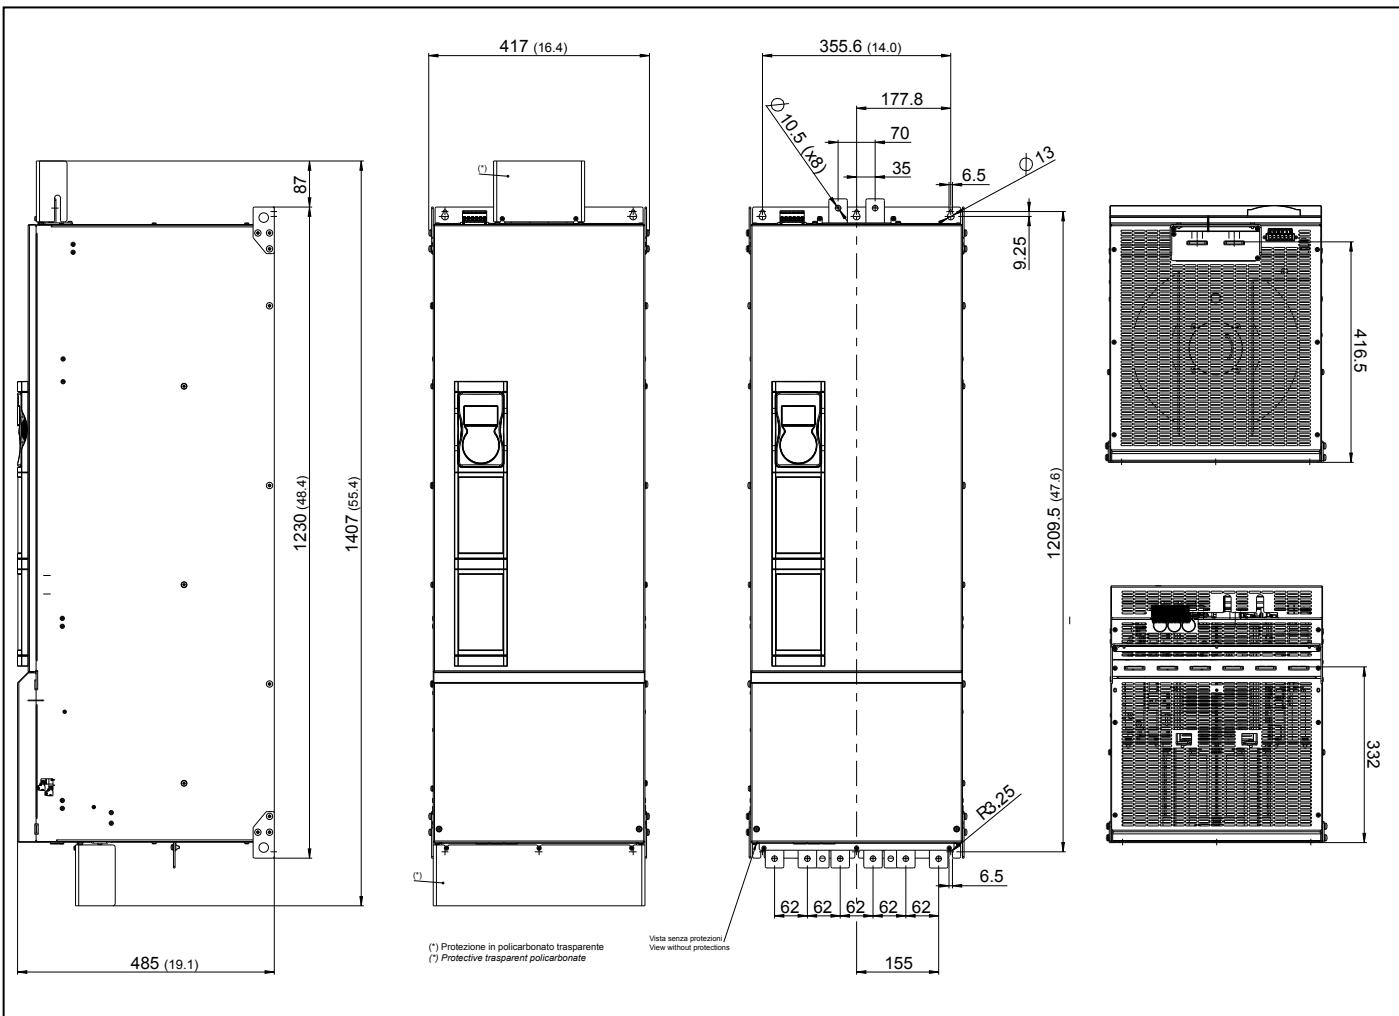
Size 7 dimensions (ADV200 SP-...-4)
